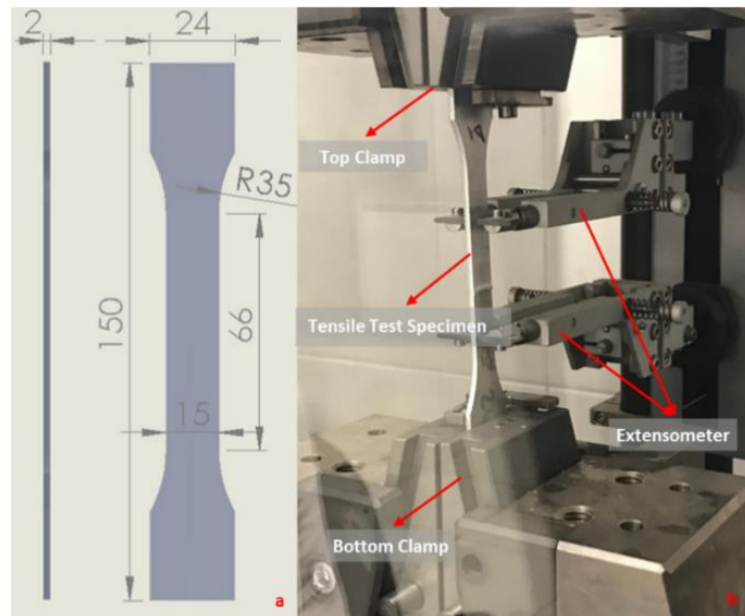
Sample technical drawing (a), Tensile test sample application (b).
